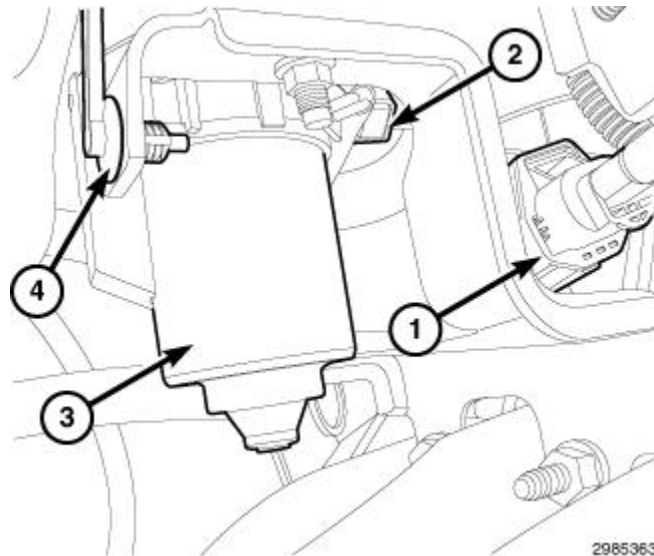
Electrical Connector, Harness Connector, Hose & Vacuum Pump
